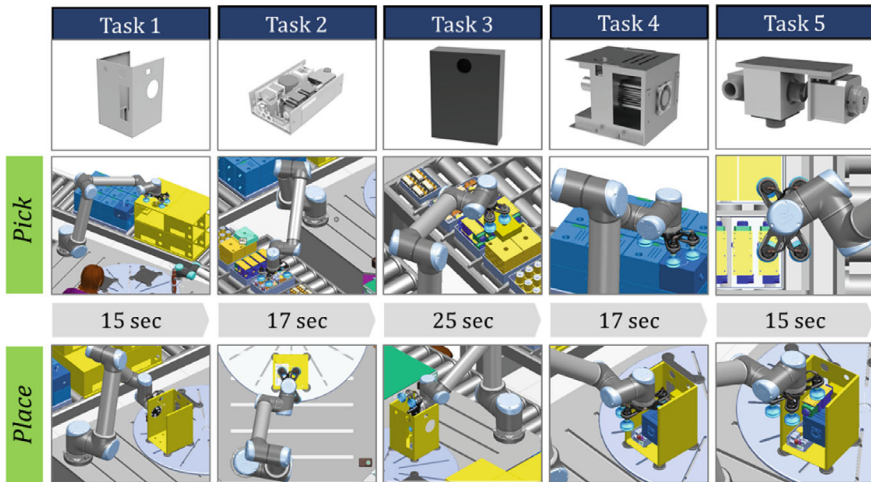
Sketch shows the assembly process sequence in a robotic assembly process
